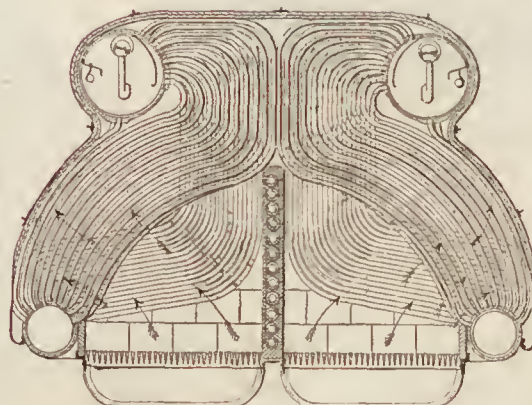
THE MOSHER DOUBLE BOILER, 1890.
